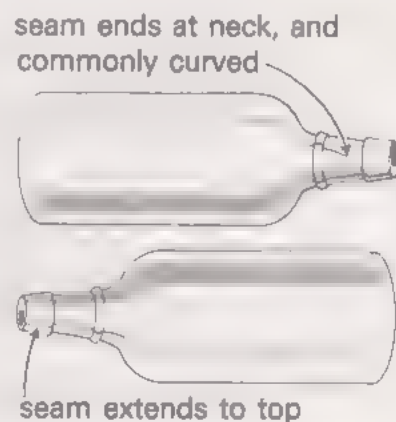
Old type bottles with hand-finished necks (top) have mold seams ending at the neck, commonly in a curve. On machine-finished bottles (bottom) the seam extends to the top.
